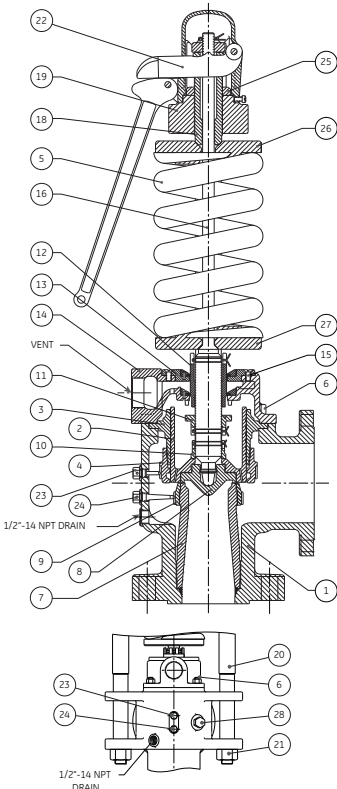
1700 Maxiflow Safety Valve – Flanged Inlet
